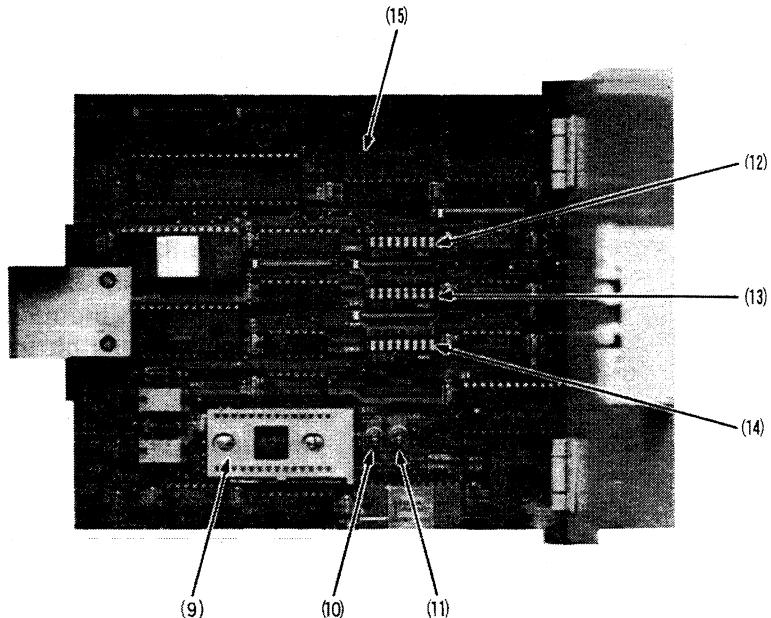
Inside View of the Drive Unit Side Door
